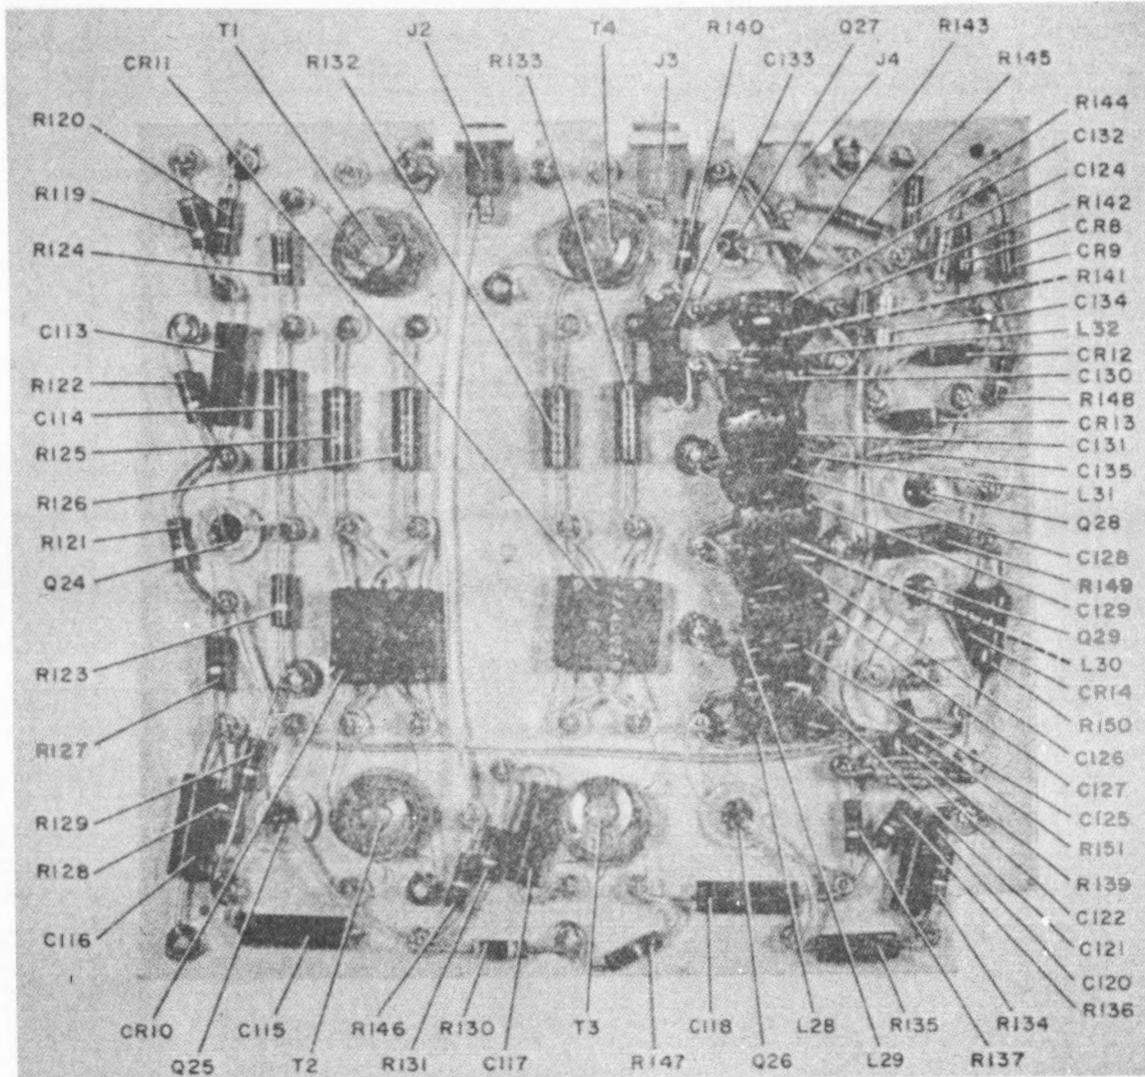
Oscillator Control C-4311/PRC-47 (A7), Card Assembly TB1, Parts Location
